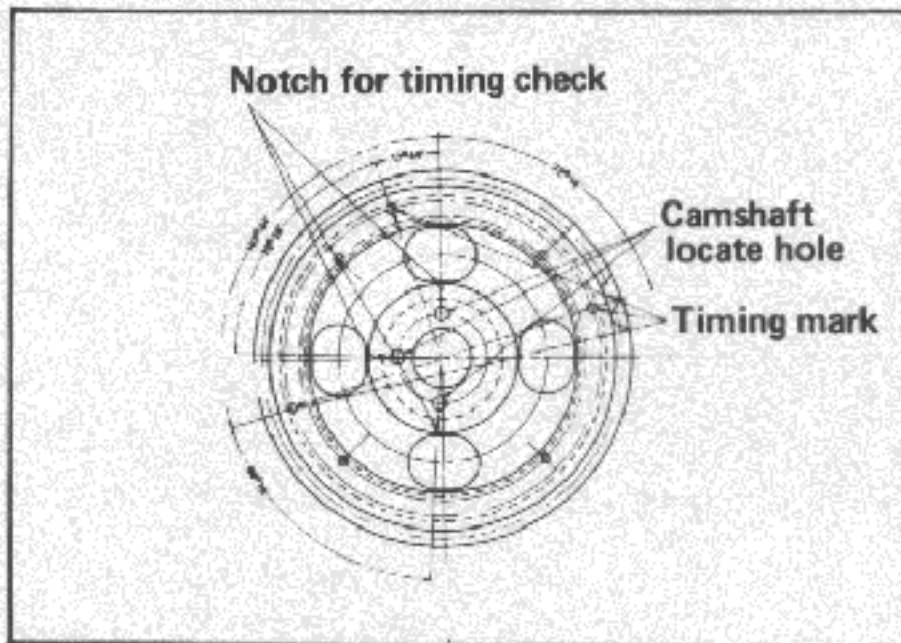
Camshaft sprocket (L13 and L16 engine)
